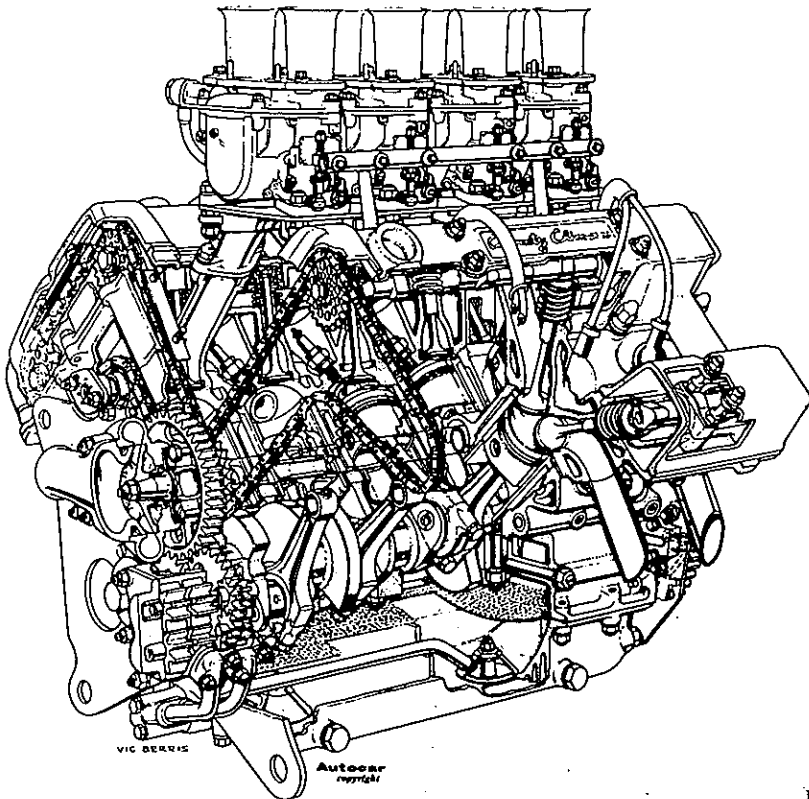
Cut-away drawing - 1.5 liter V-8
